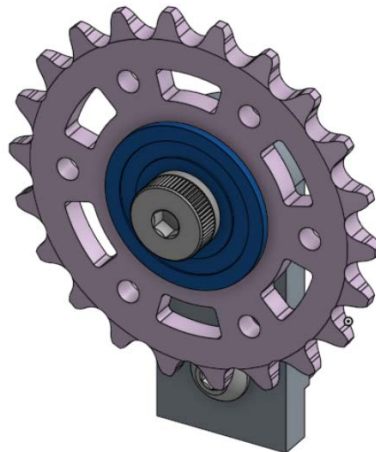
CAD Assembly of Bearing, Bracket, and Sprocket
